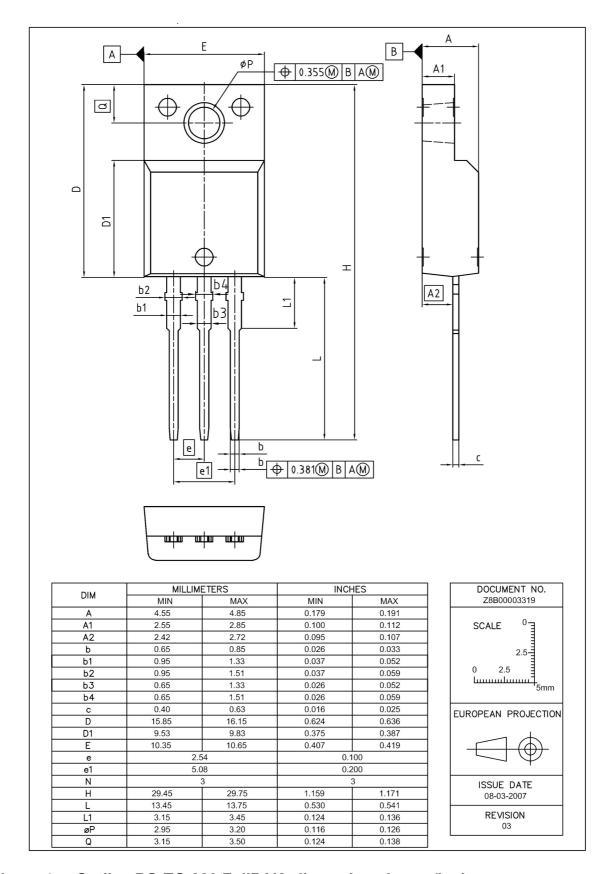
Outline PG-TO 220 FullPAK, dimensions in mm/inches
